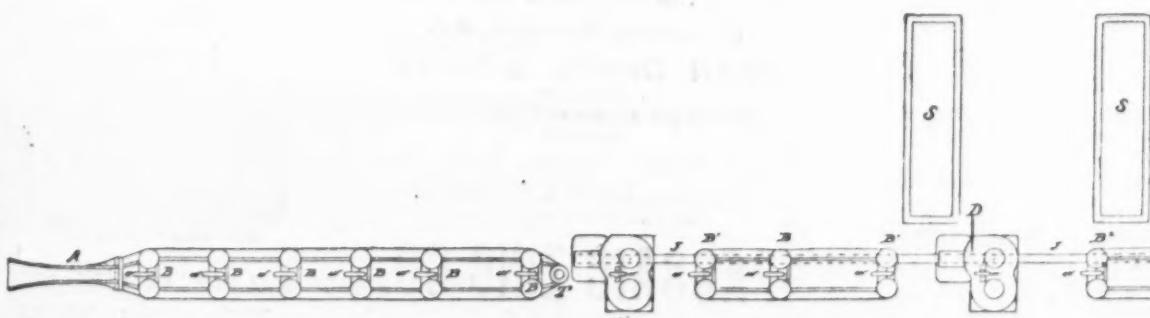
General Plan of Switch and Adjacent Grip Rolls.
